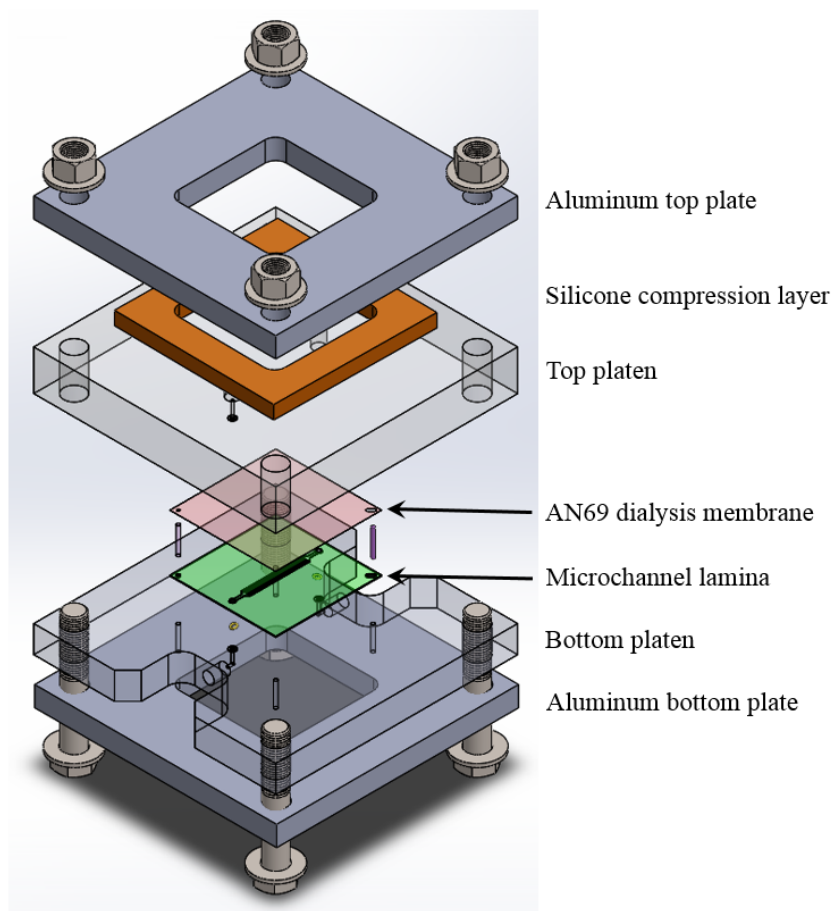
Exploded 3D schematic of the dialysis enclosure used for the PEO-coating study.
